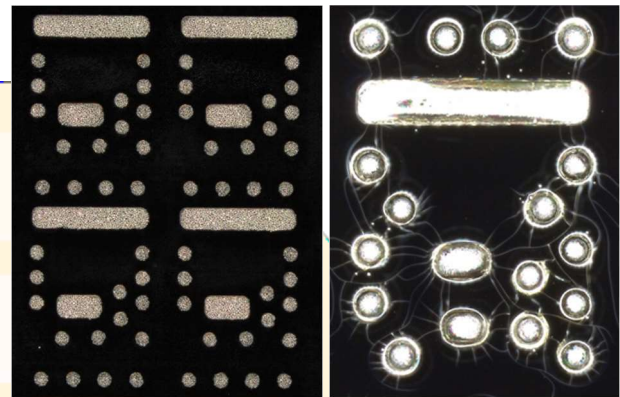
Left: Type 6 solder paste as printed. Right: After solder reflow.
